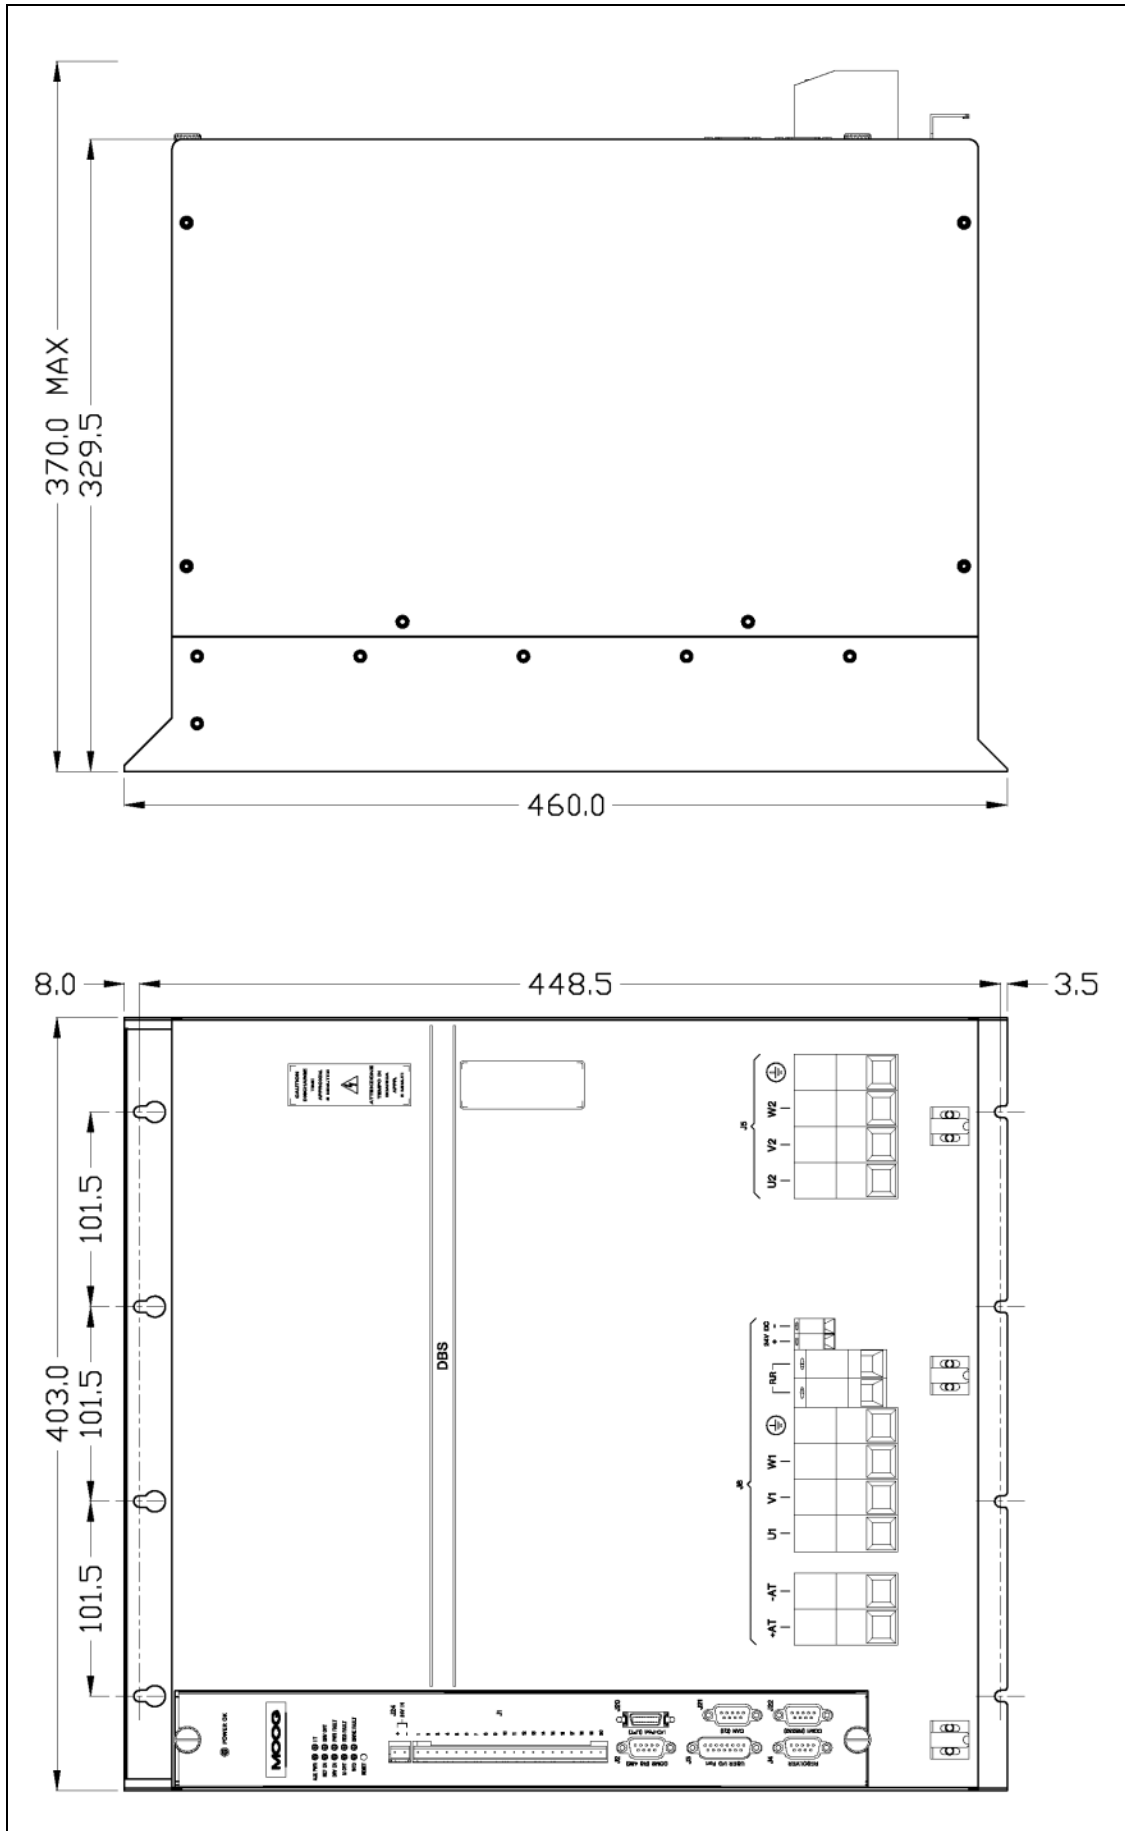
A IDBS 100/320 - Dimensions and Drilling Jig (Drill For M5 Screws)
